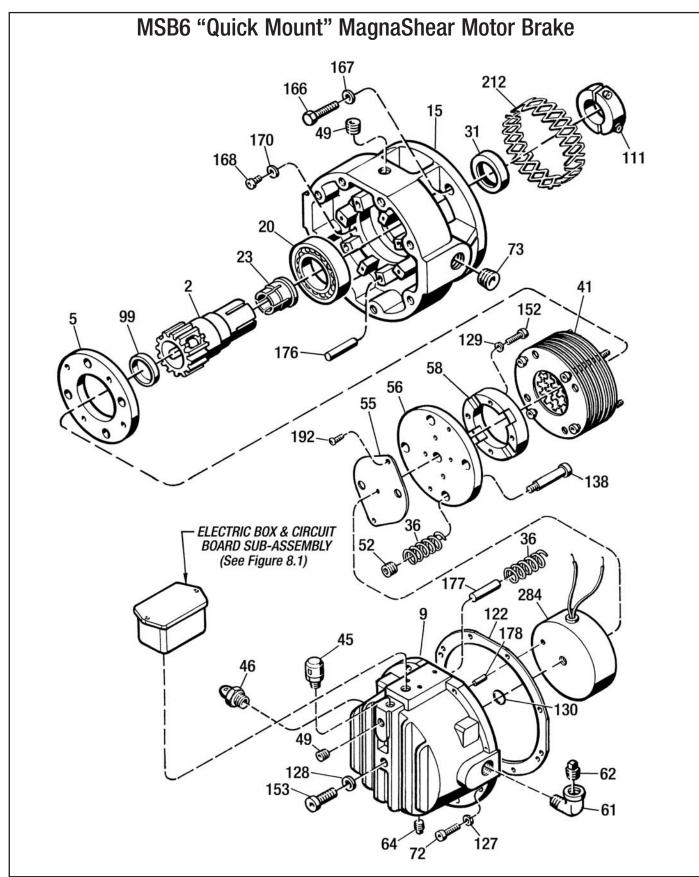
MSB6 "Quick Mount" MagnaShear Motor Brake
